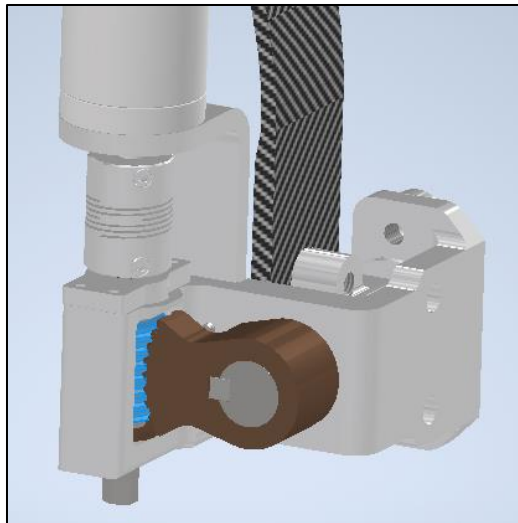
Motor-driven DAFO angle adjustment mechanism.
